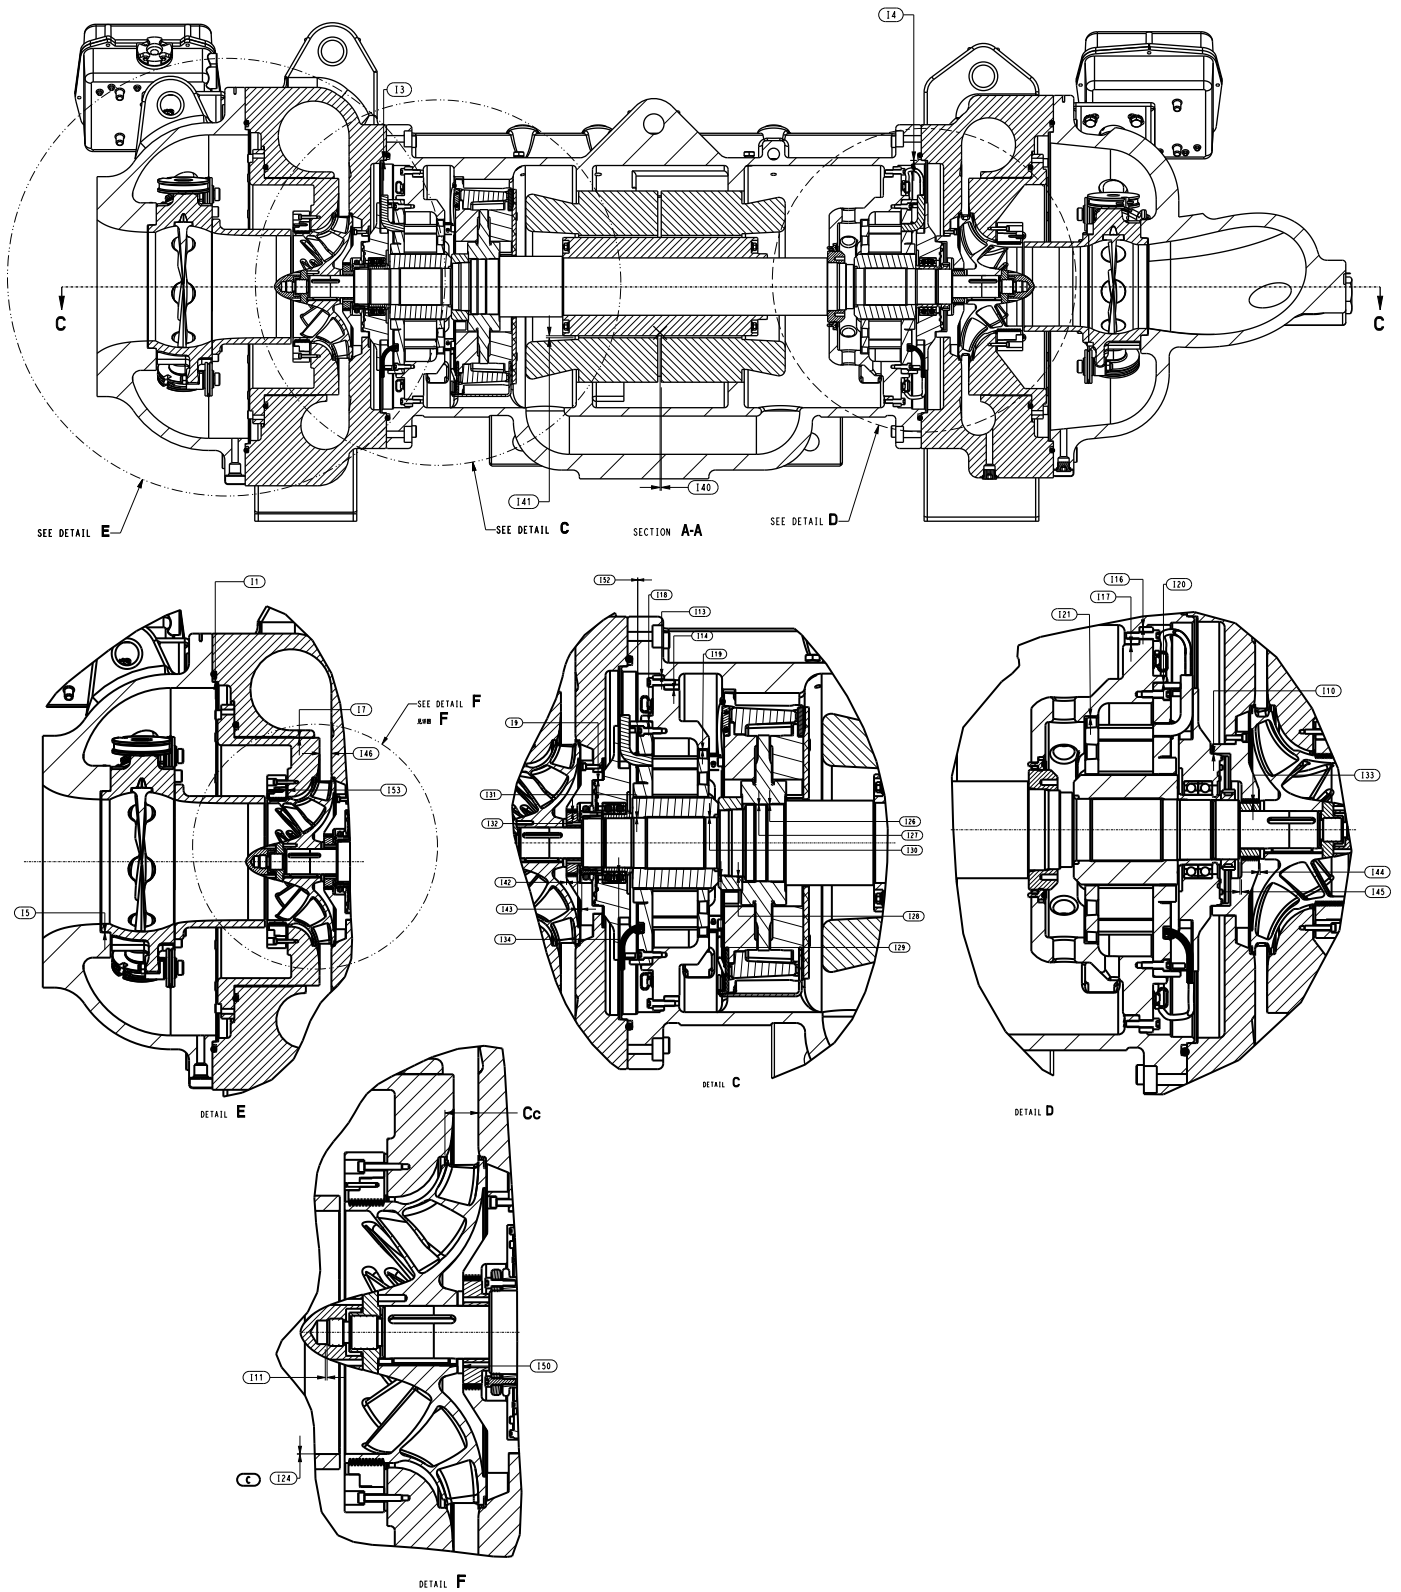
19MV Magnetic Bearing Compressor Components
